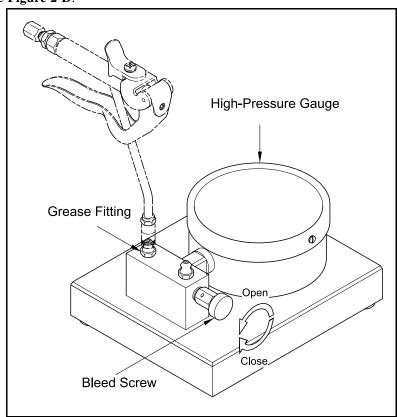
High-Pressure Test Gauge Assembly - Model 5287
